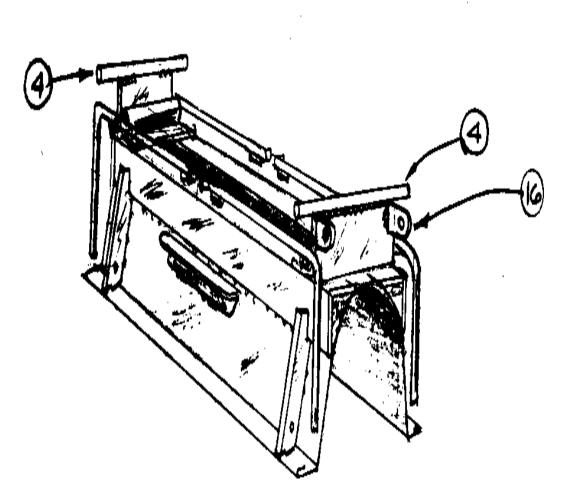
WELD ON HINGE PIECES (16) ON BOTH ENDS
